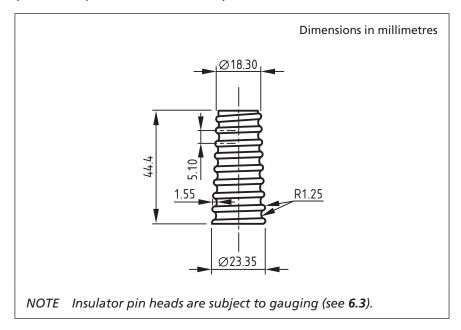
Dimensions of large steel insulator pin head (see Table 1, reference number 16)
